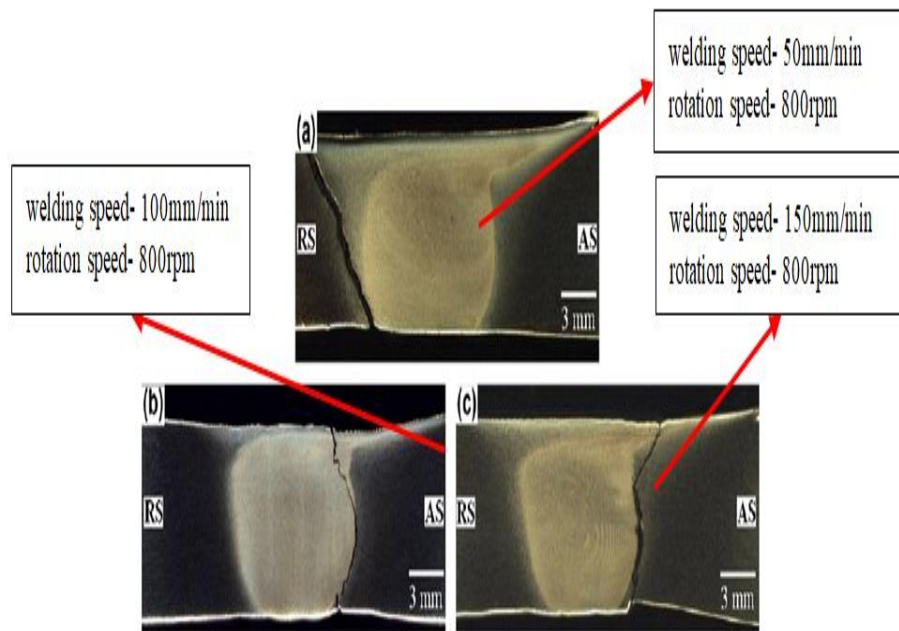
Fracture locations of the joints welded at different welding speeds: (a) 50 mm/min, (b) 100 mm/min and (c) 150 mm/min.
